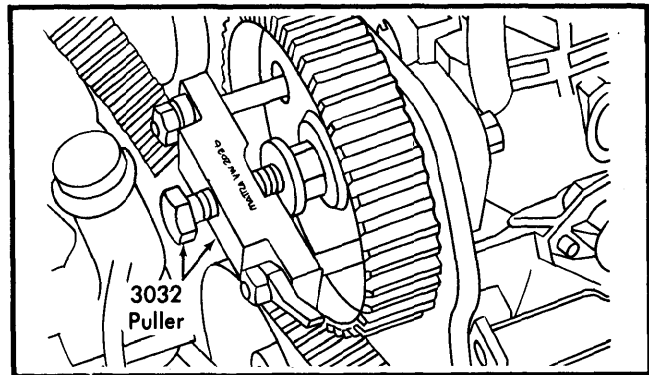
Fuel Injection Pump Gear Removal (Audi Shown)
